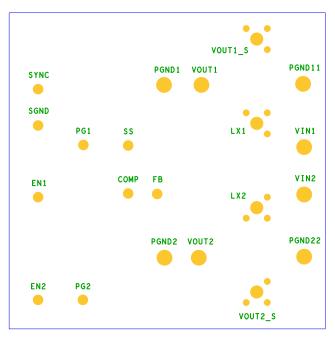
BOTTOM COMPONENTS (MIRROR)
